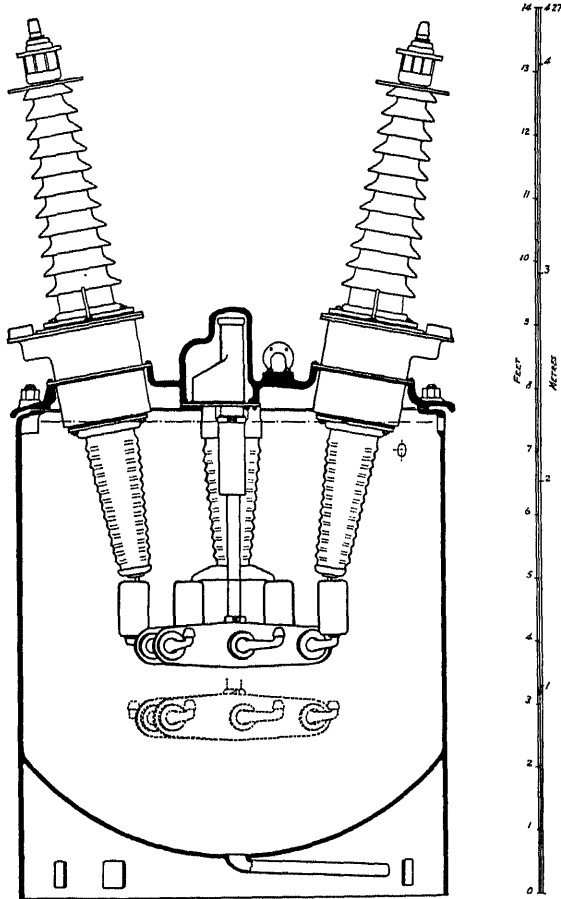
Cross section of outdoor type circuit breaker 132 kV. 1 500 000 kVA breaking capacity. Six breaks per phase. Welded steel tank and cast steel top plate, to withstand hydraulic test pressure of 200 lbs./sq.in. (14 kg/cm²). Condenser bushings. Rack and pinion operation.
